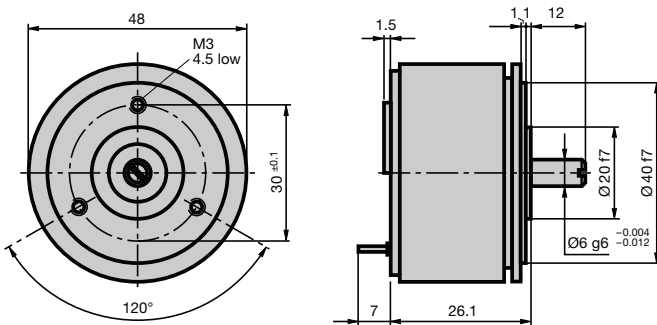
KINAX 2W2 with special drive shaft at front only,
